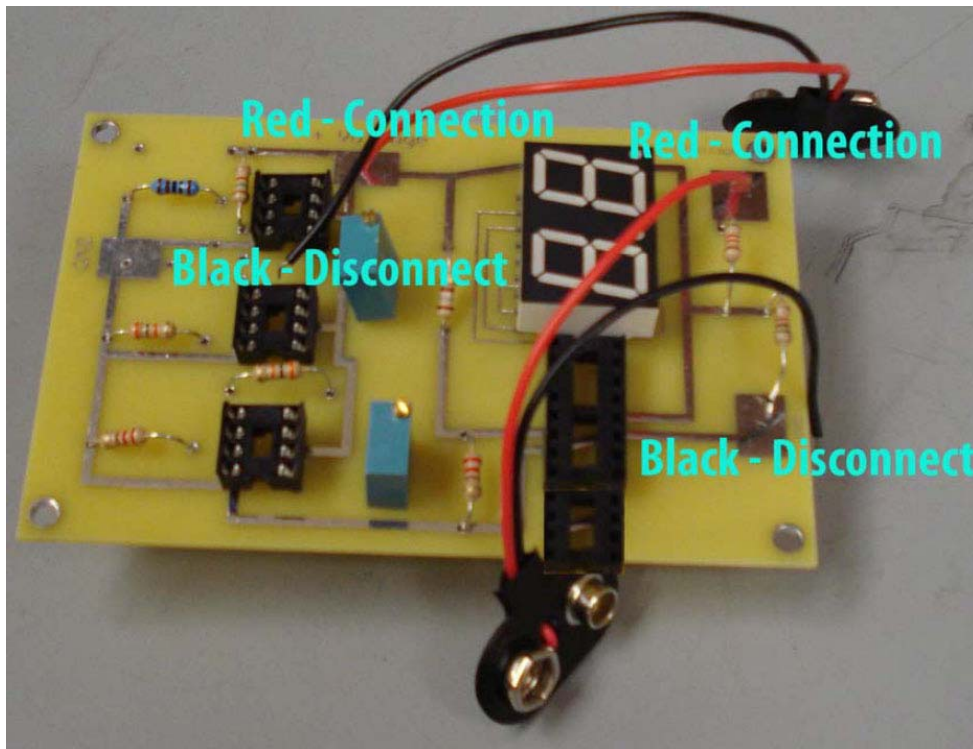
Connecting RED battery connector wires to metal part of PCB labeled “Voltage.”
